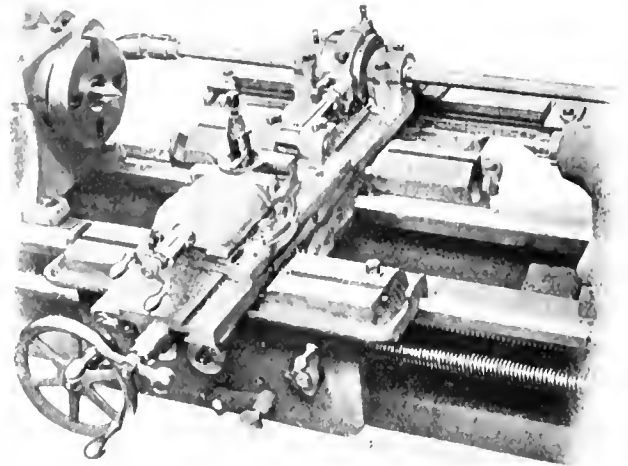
Rear View of Lathe fitted with Irregular Turning and Boring Attachment.
